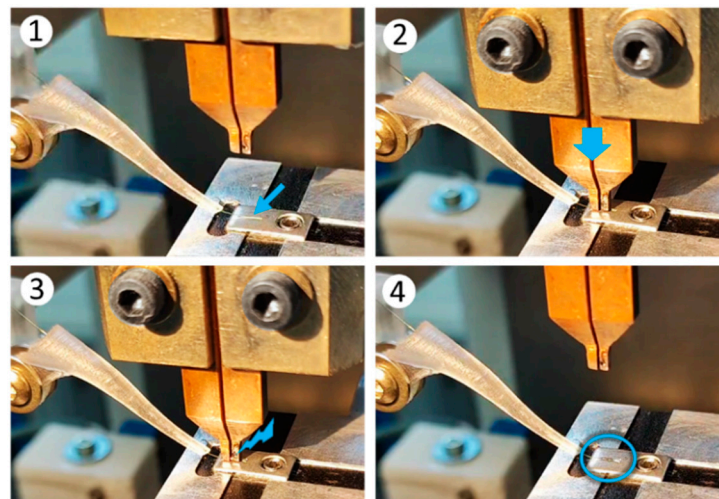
Step by step pictures of the resistance welding process: (1) placement of sheet metal sample and NiTi wire under weld head; (2) weld head moved down, applying pressure on SMA wire with both electrodes; (3) welding current is run through workpieces via copper electrodes; (4) weld head is moved up and NiTi wire is joined to steel substrate.
